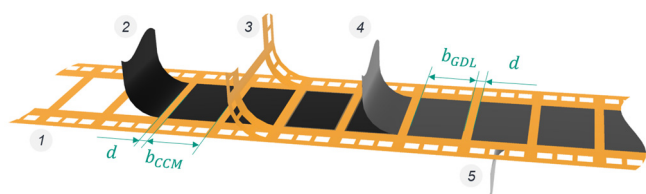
Schematic illustration of the assembly process of 7-layer MEA (1: lower subgasket, 2: CCM, 3: upper subgasket, 4: GDL-anode, 5: GDL-cathode)
